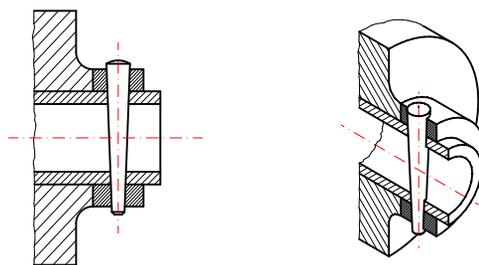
Hatches in a cross section of a mechanical drawing.
